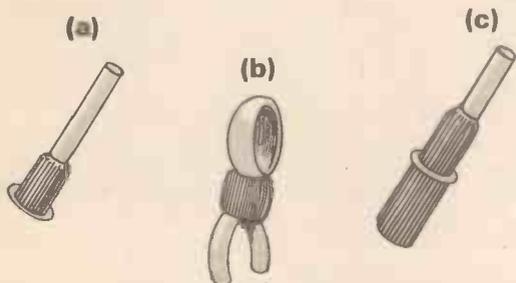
Types of terminal post. (a) Single-sided. Inserted from the print side, the serrated boss holds the post firm in the hole while the bottom stud is soldered to the print. (b) Eyelet post inserted from component side. (c) Double-sided post.
